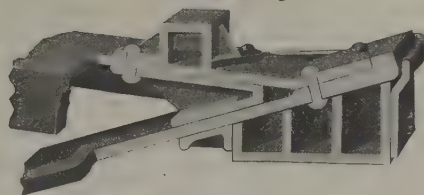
Huntoon Truck Bolster with Peerless Side Bearings for 30, 40, 50 and 70-Ton Capacity Freight Cars. Joliet Railway Supply Company.
